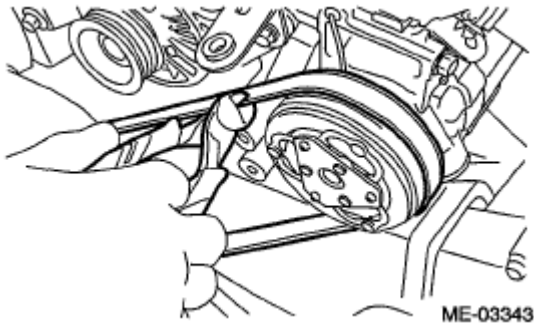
Cutting Rear Side Belt Using Wire Cutter
